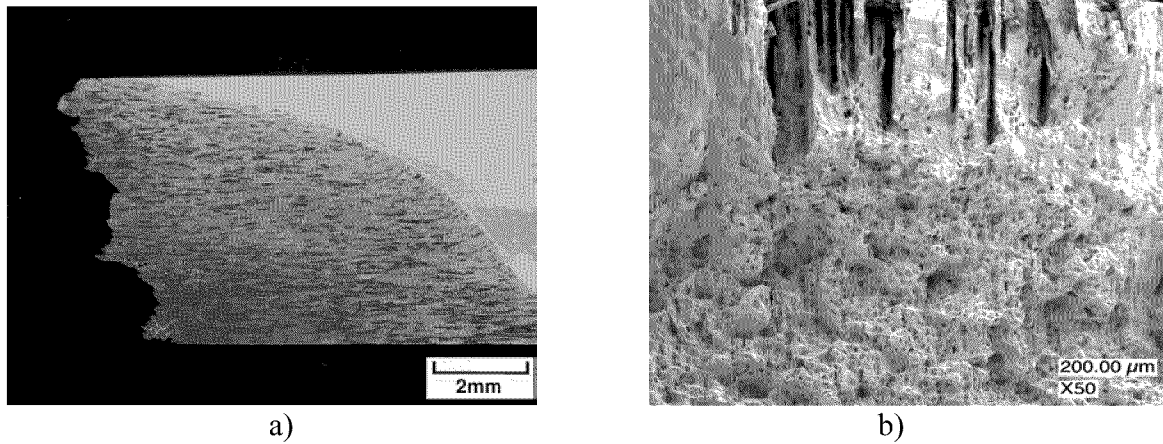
SCC fracture in FSW AA7075-T751 a) Optical macrograph showing cross sectional view and b) SEM photomicrograph of the fracture face.
